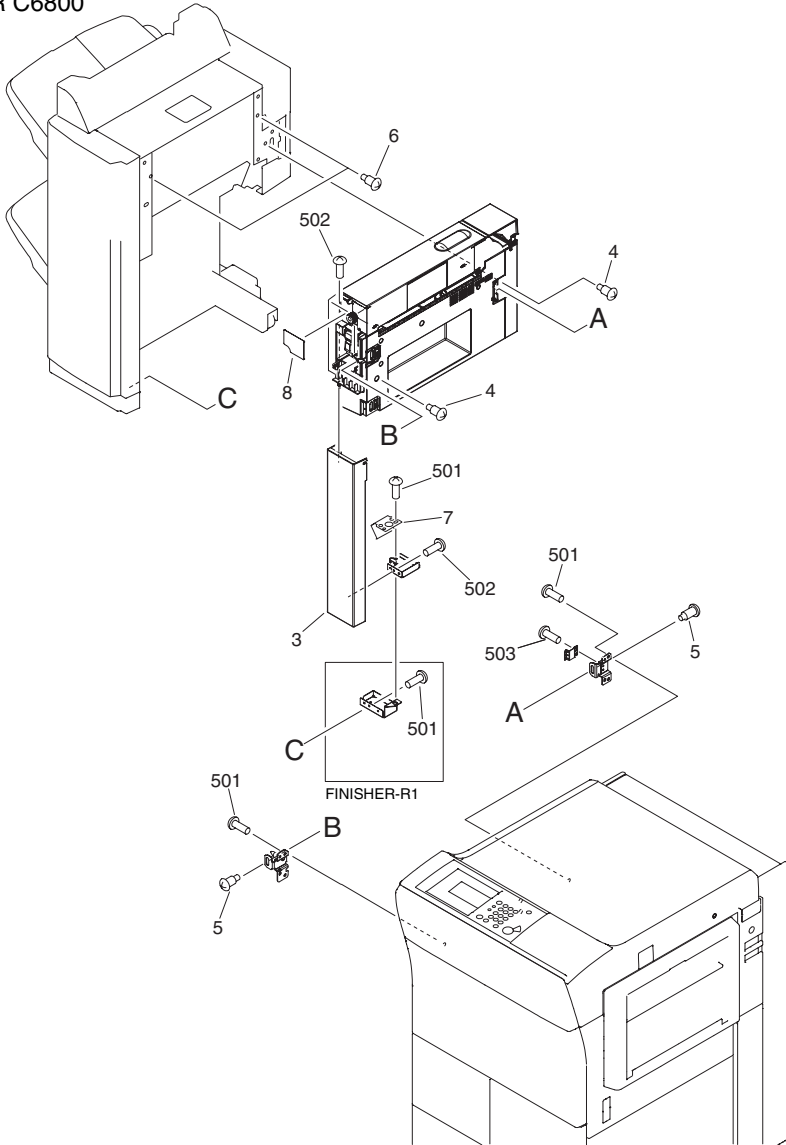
# FIGURE QA ASSEMBLY LOCATION DIAGRAM
